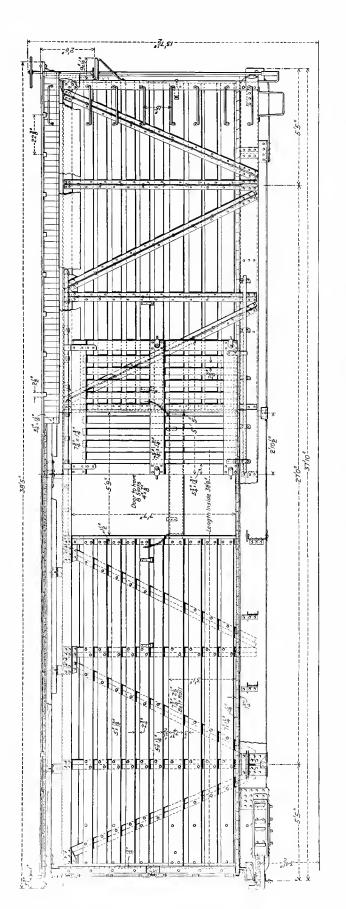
End Elevation and Cross Sections of Oregon Short Line Steel Frame Stock Car Shown in Fig. 367.
